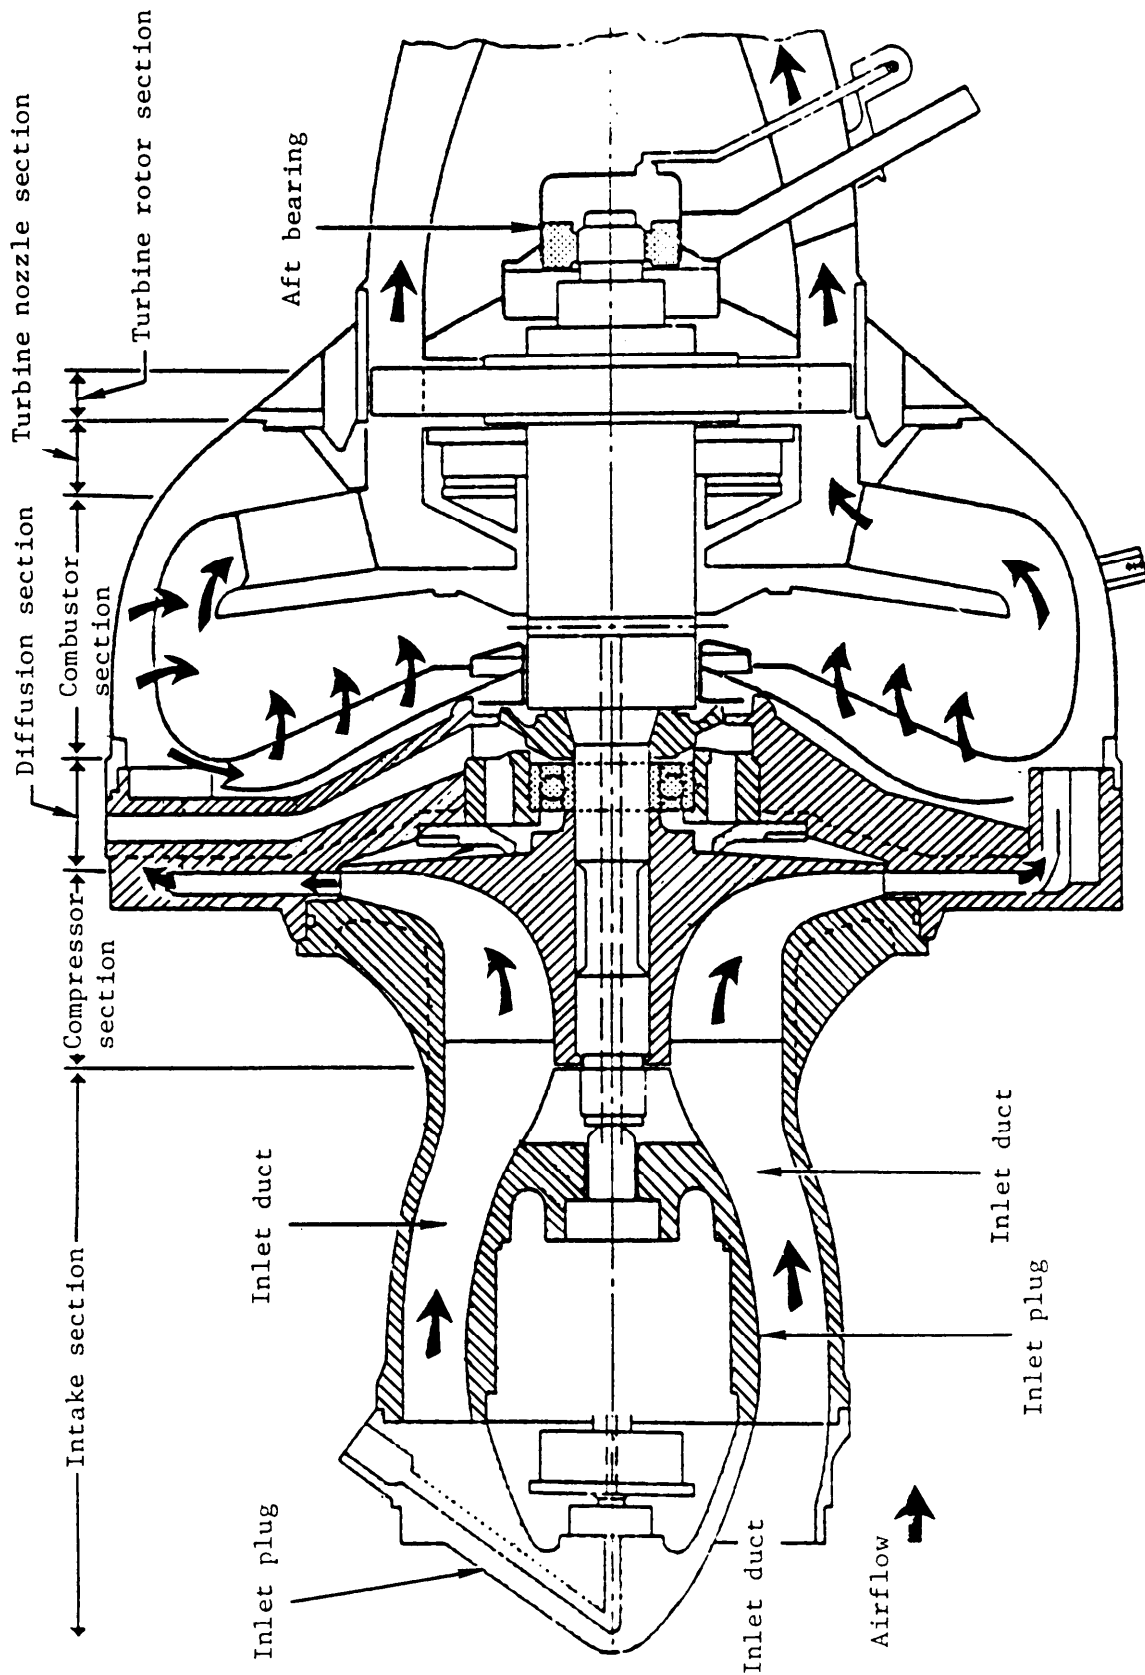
Williams WR2-5c turbojet engine cross section.
